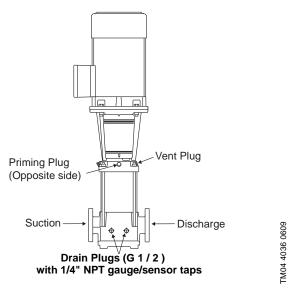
Plug/valve locations CR(N) 32, 45, 64, 90, 120, 150
